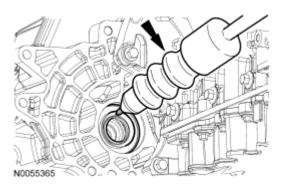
Poking A Small Hole In Halfshaft Seal Using A Suitable Awl Courtesy of FORD MOTOR CO.
